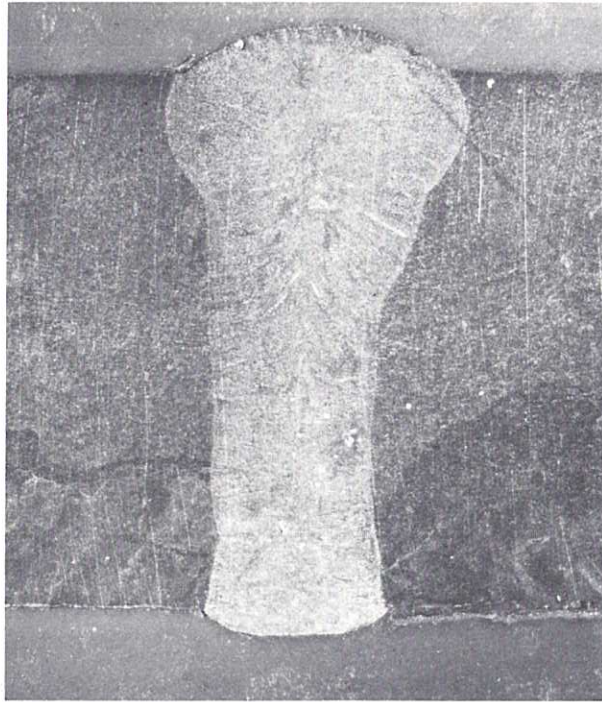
Laser weld in 4.8mm mild steel (4kW, 30mm s<sup>-1</sup>).
